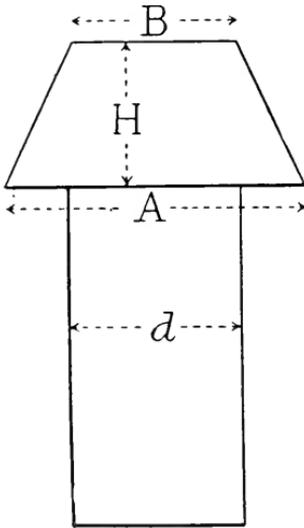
ILLUSTRATING A "CONE HEAD."
